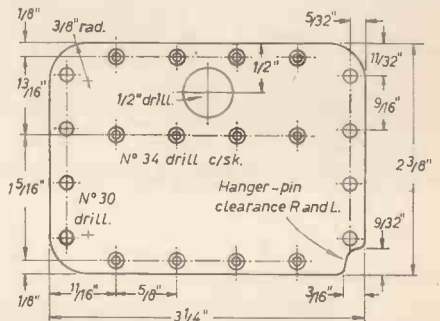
Details and dimensions of the flange plate for piston-valve cylinders.
